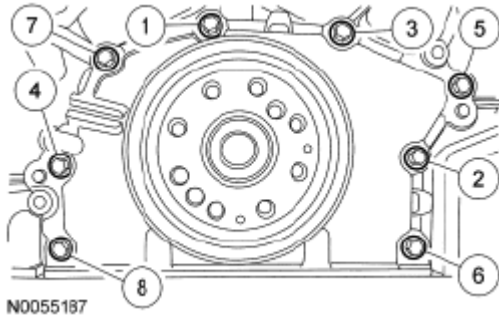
Identifying Crankshaft Rear Seal Retainer & Bolts Tightening Sequence
